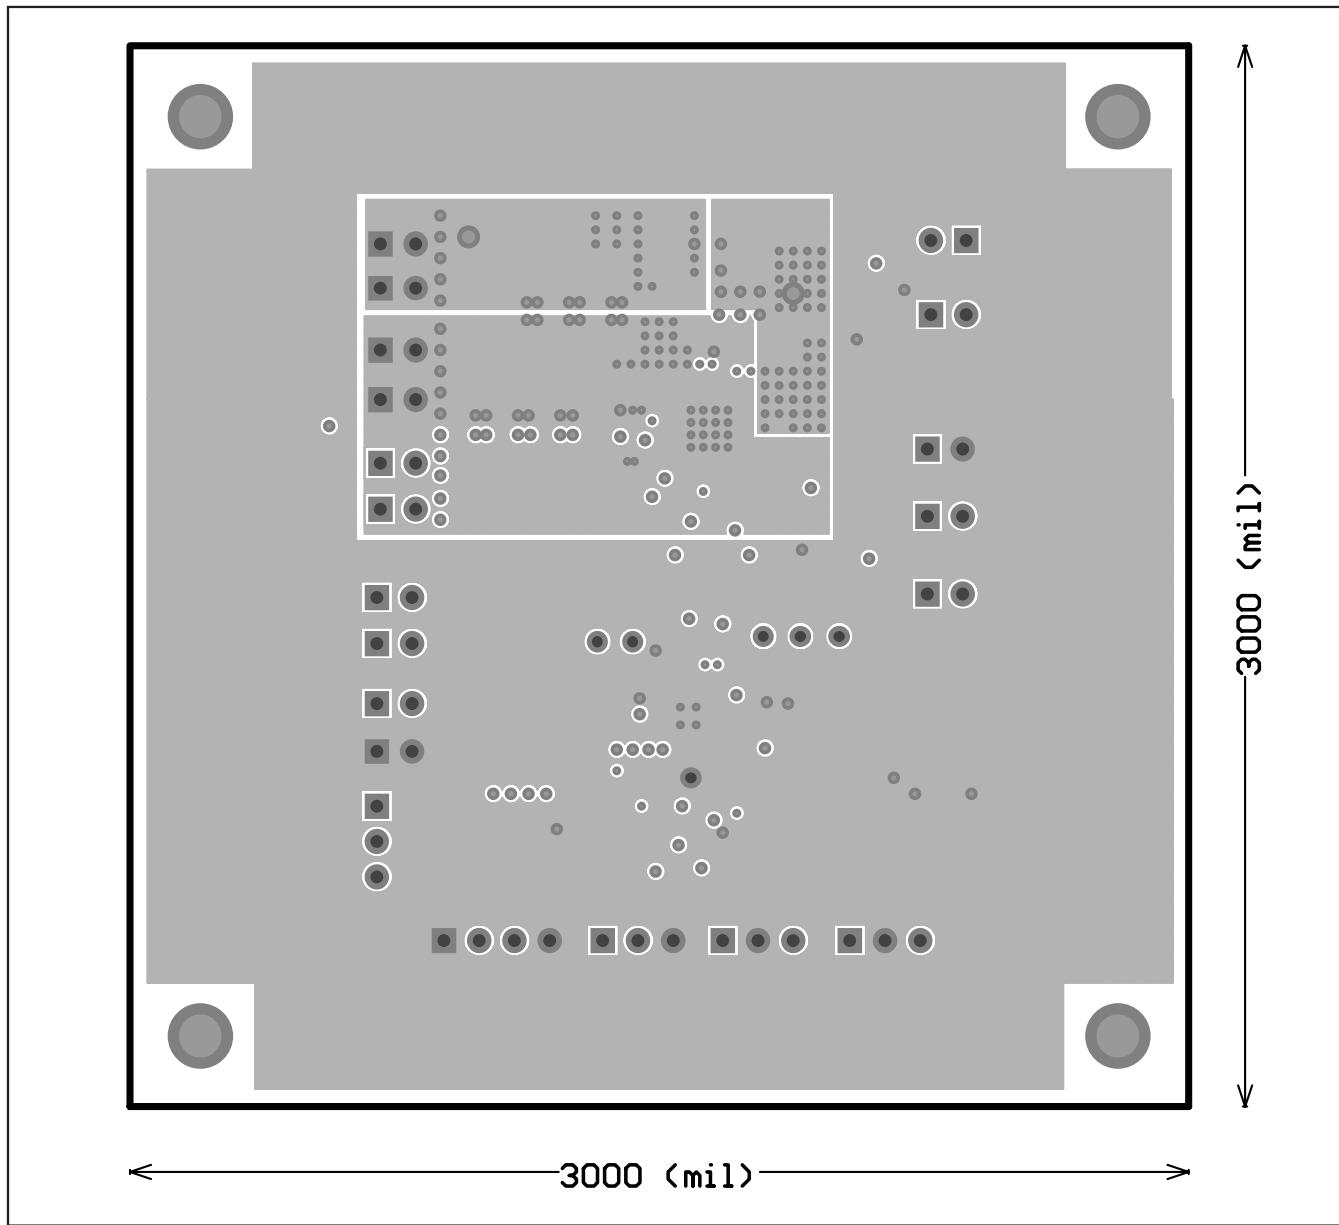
MAX8654 EV Kit PCB Layout—Inner Layer 3
